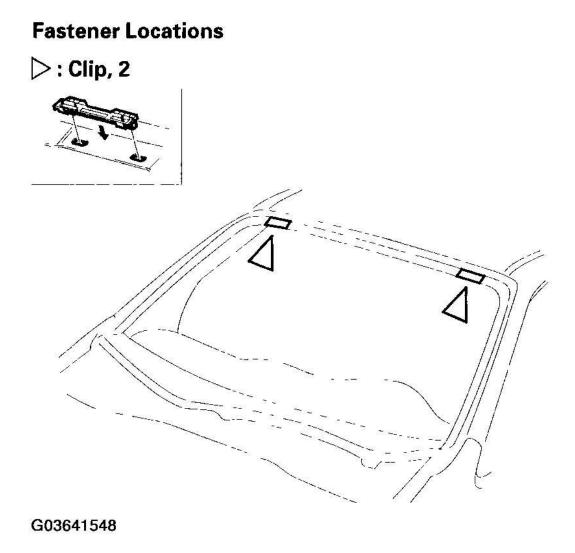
Installing Clips To Body Courtesy of AMERICAN HONDA MOTOR CO., INC.
